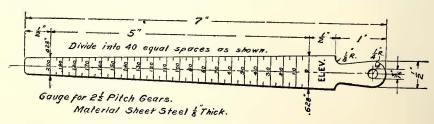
Gage for Measuring Wear of Gear and Pinion Teeth
